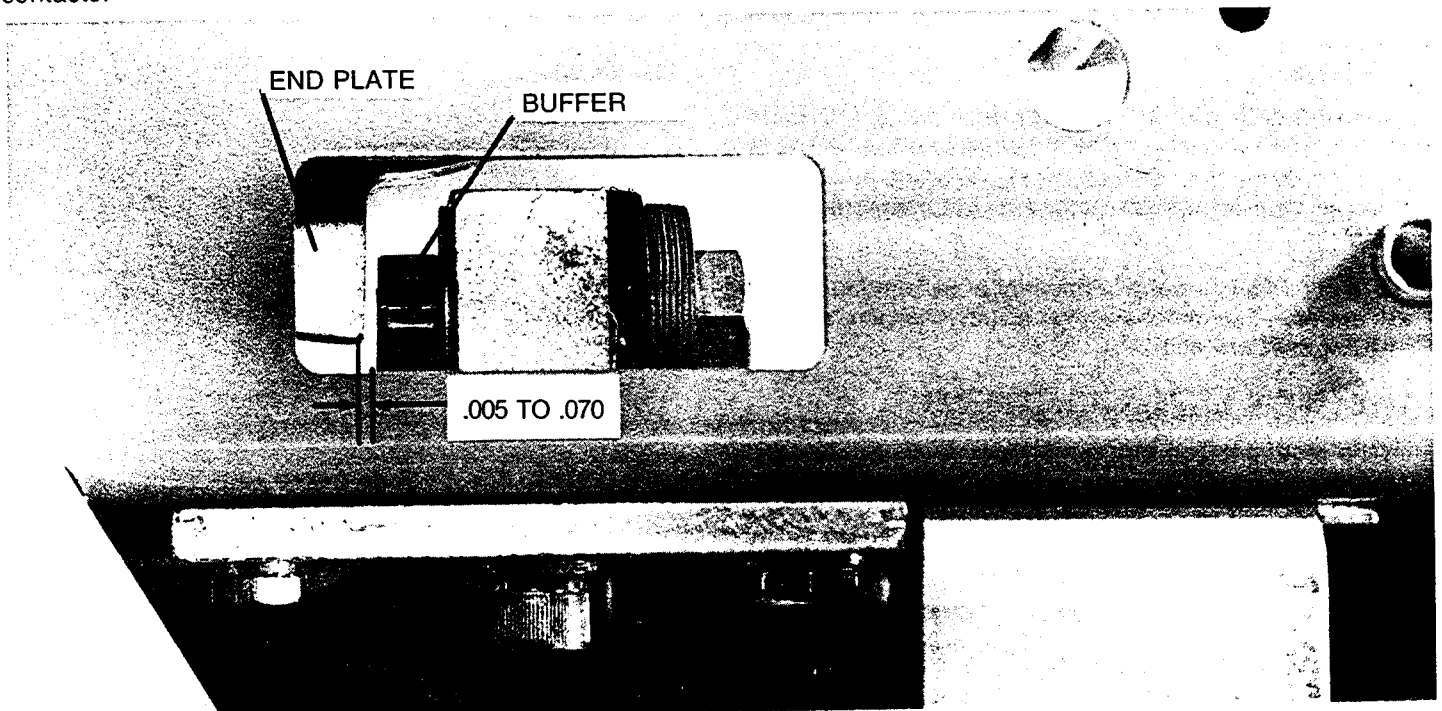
BUFFER/END PLATE RELATIONSHIP—BREAKER CLOSED
